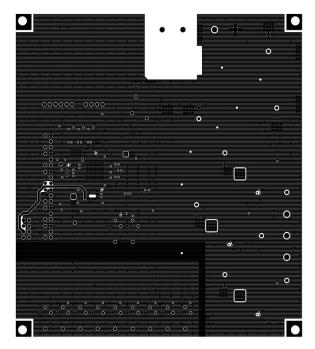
3rd layer of PCB for Hall Sensor Driver
